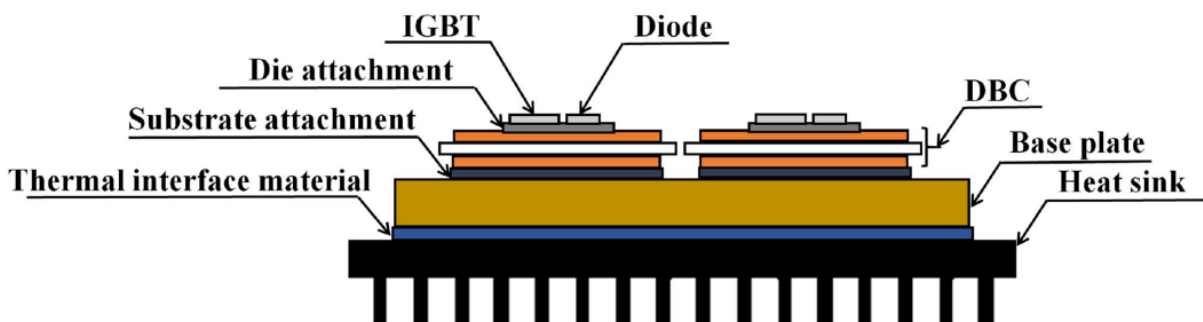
Cross-sectional sketch of the IGBT module with heat sink
